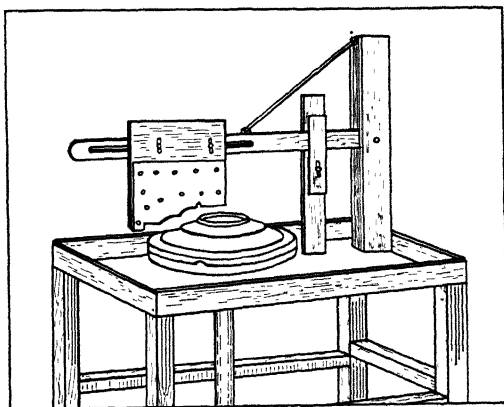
This homemade jolley and jigger machine will do good work if accurately made, and is within the range of any craft shop. The removable arm is called the jolley and the revolving head, the jigger. Plates are made with the bottom up on this machine.
